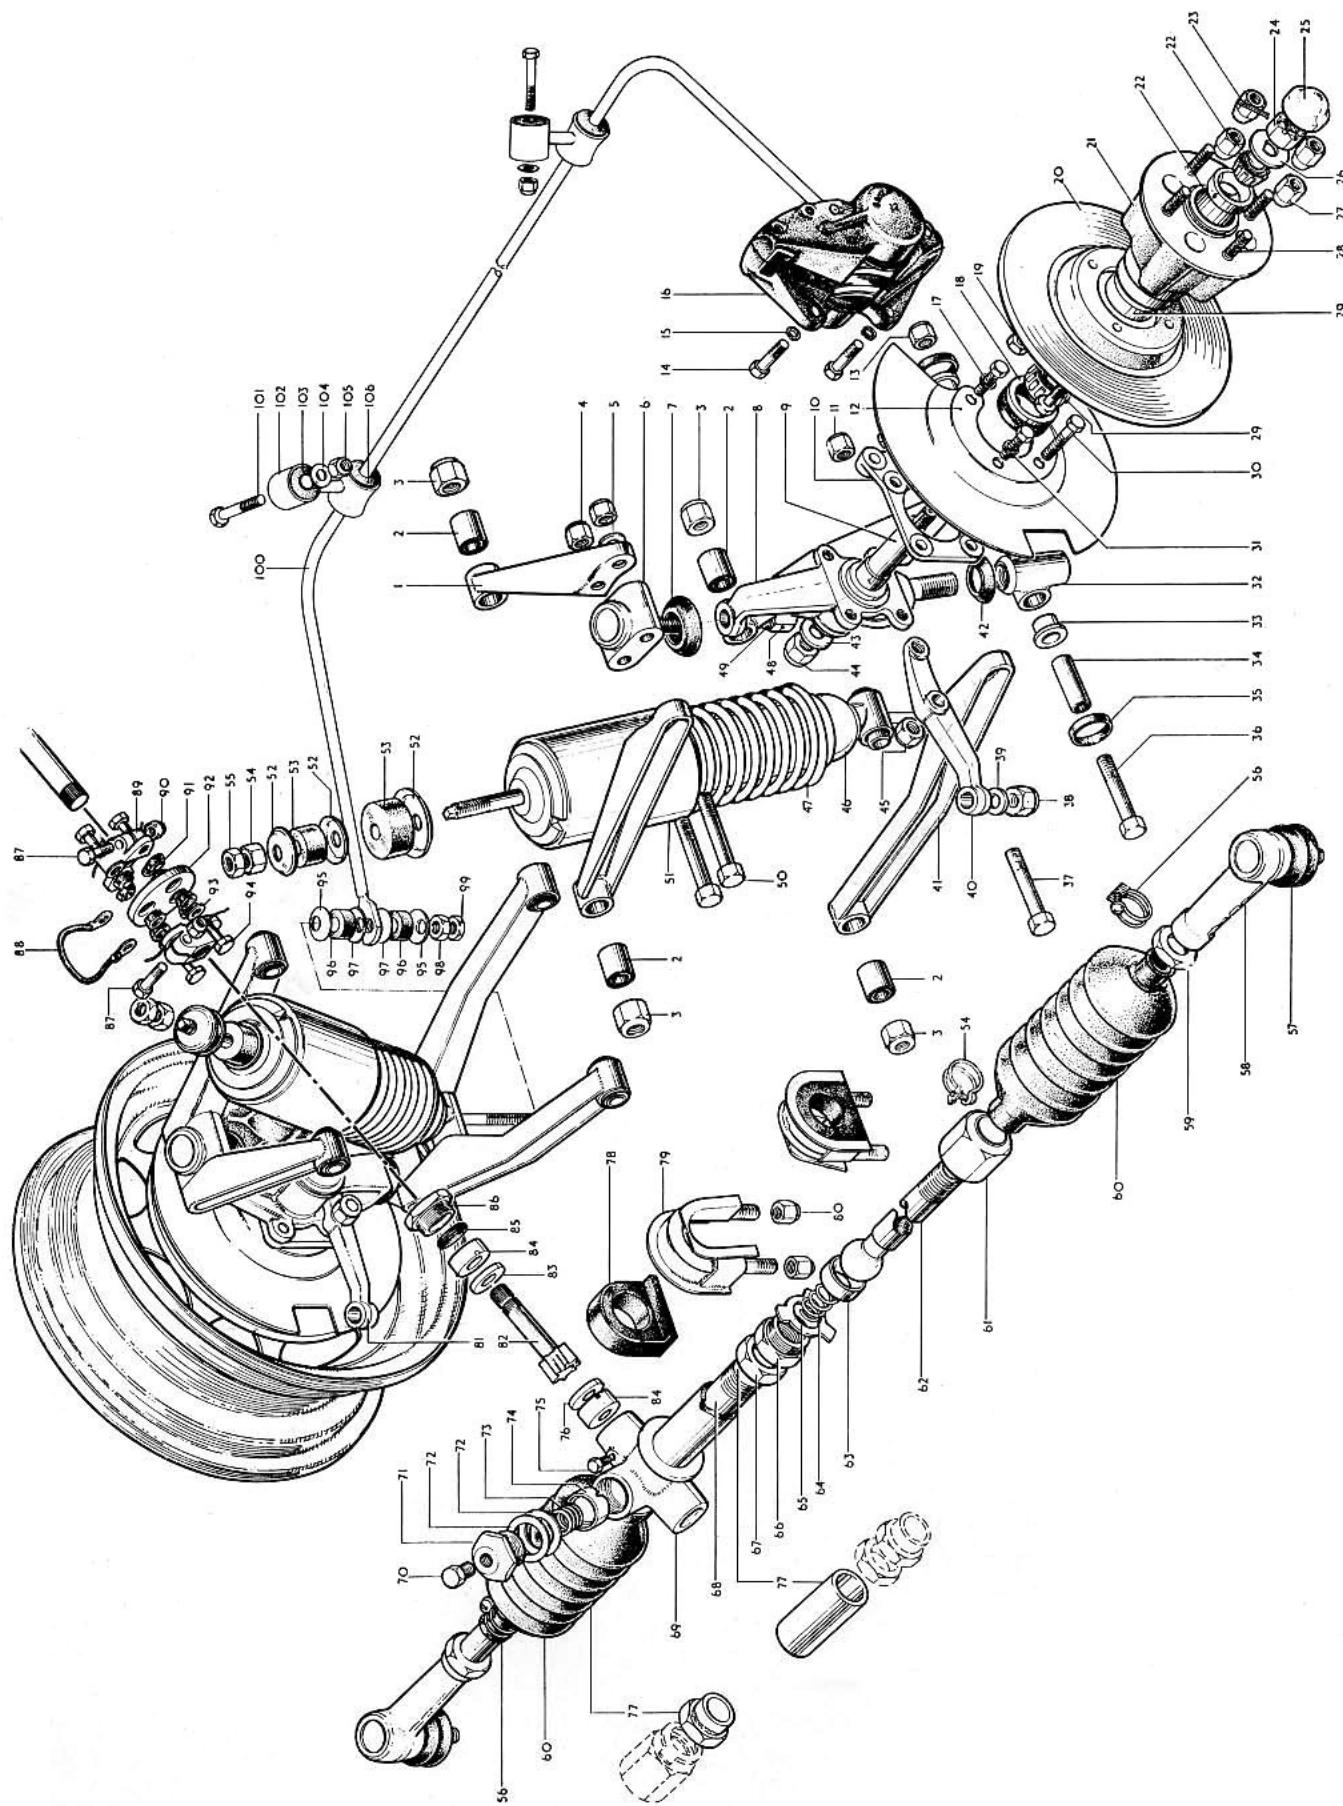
FRONT SUSPENSION AND STEERING COMPONENTS
